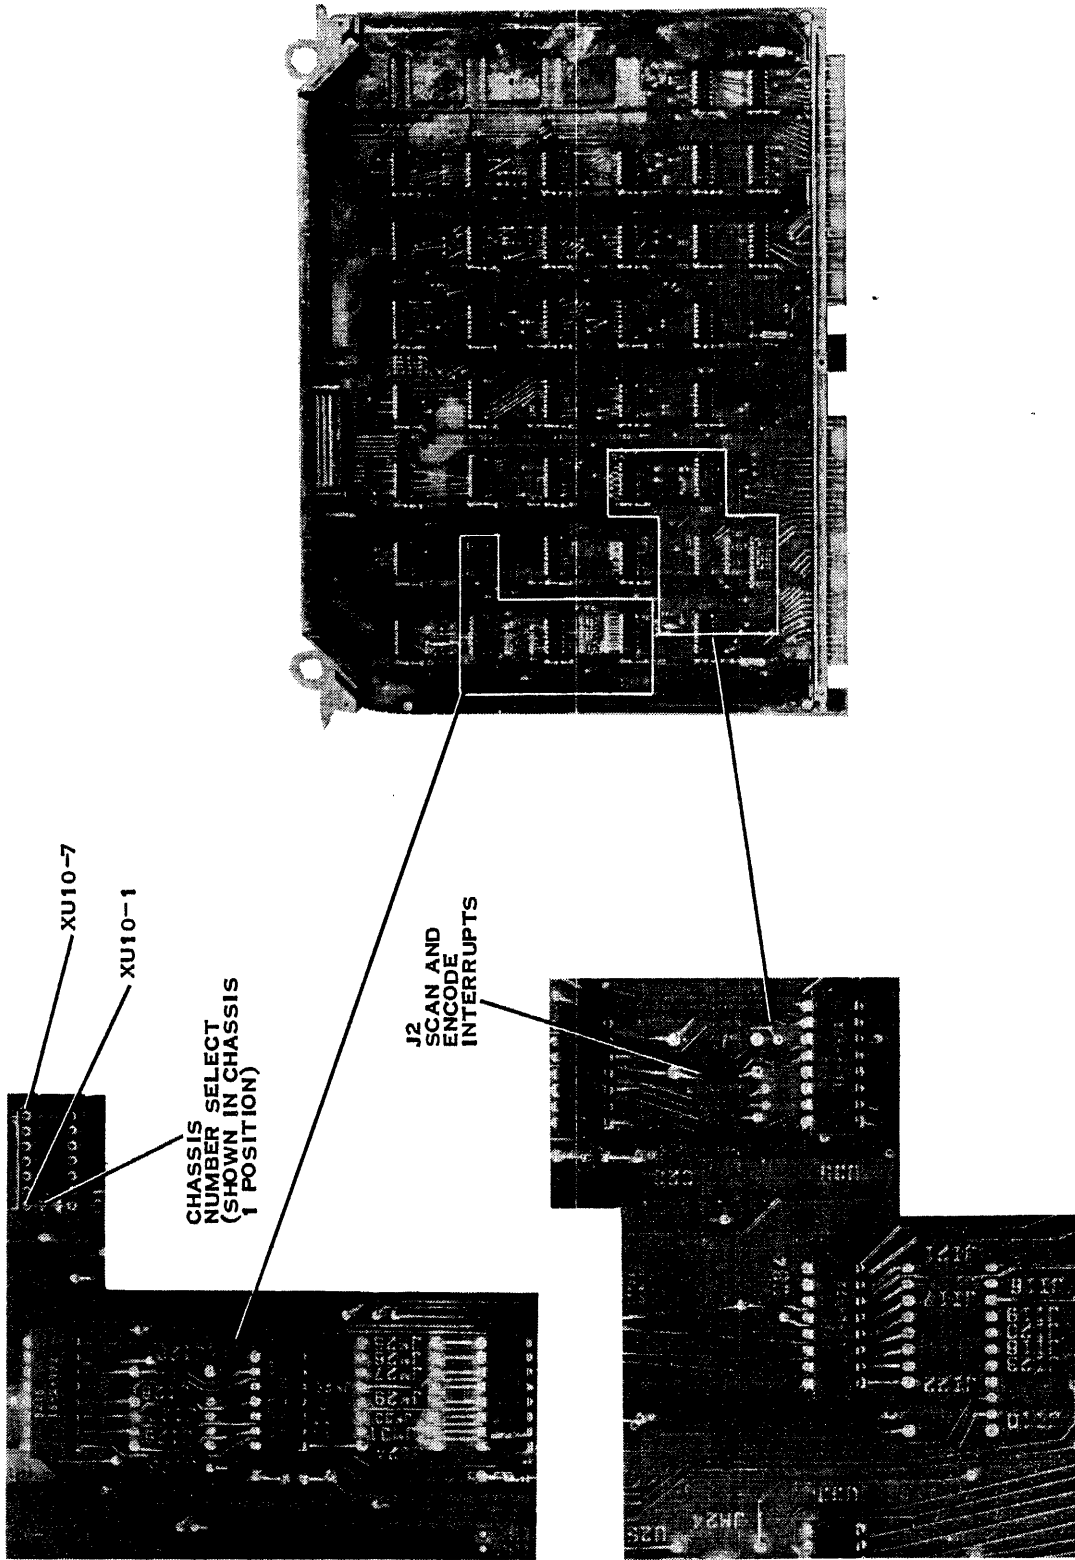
CRU Buffer LR Standard Jumper Settings
